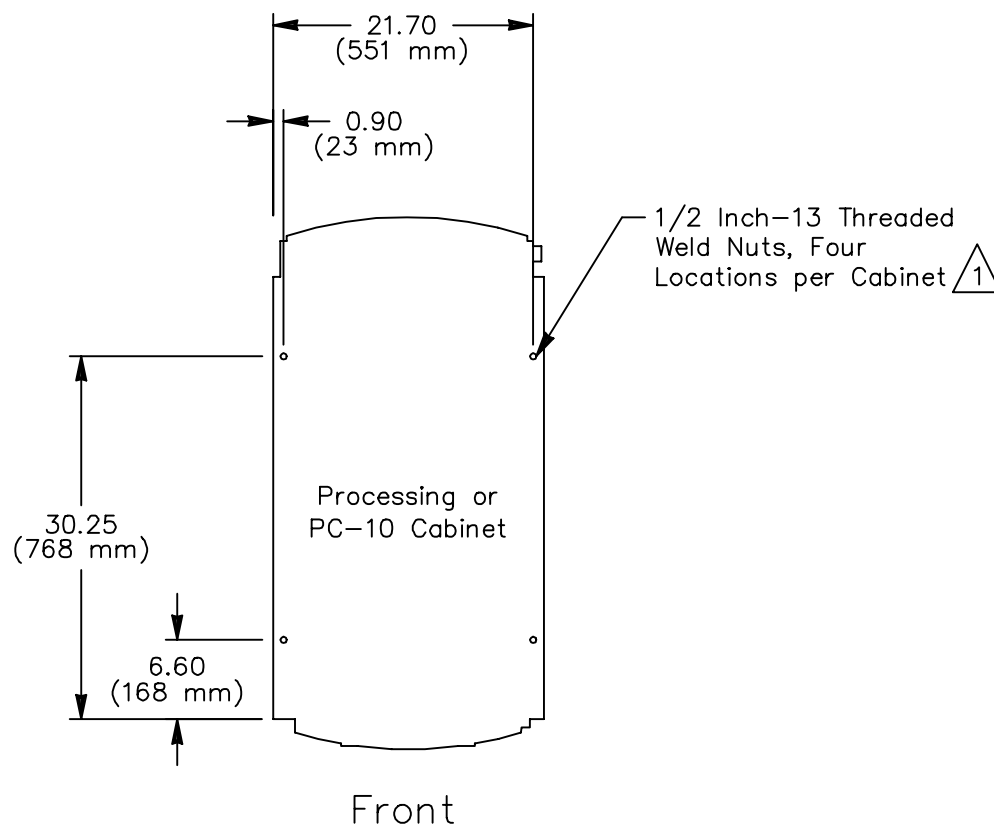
CRAY SVI-1A Floor Cutout Diagram
